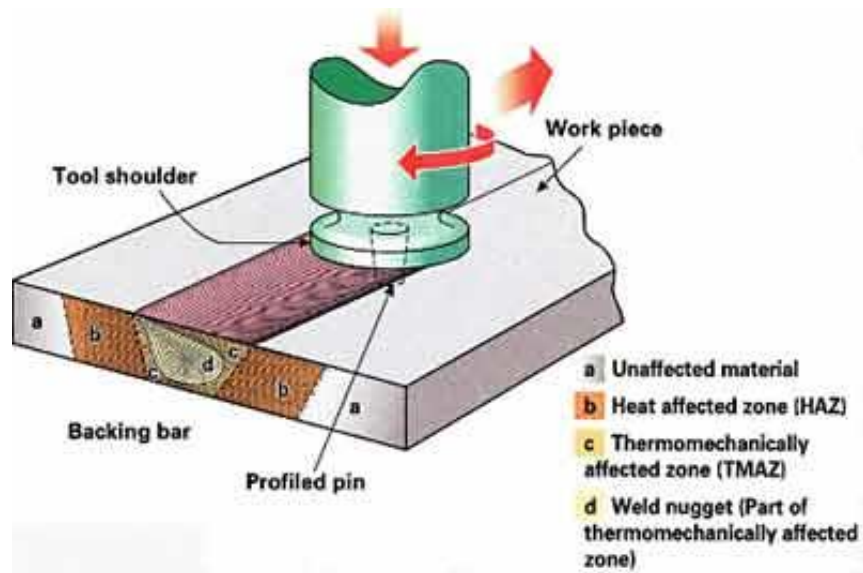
Friction Stir Weld Metallurgical Zones
